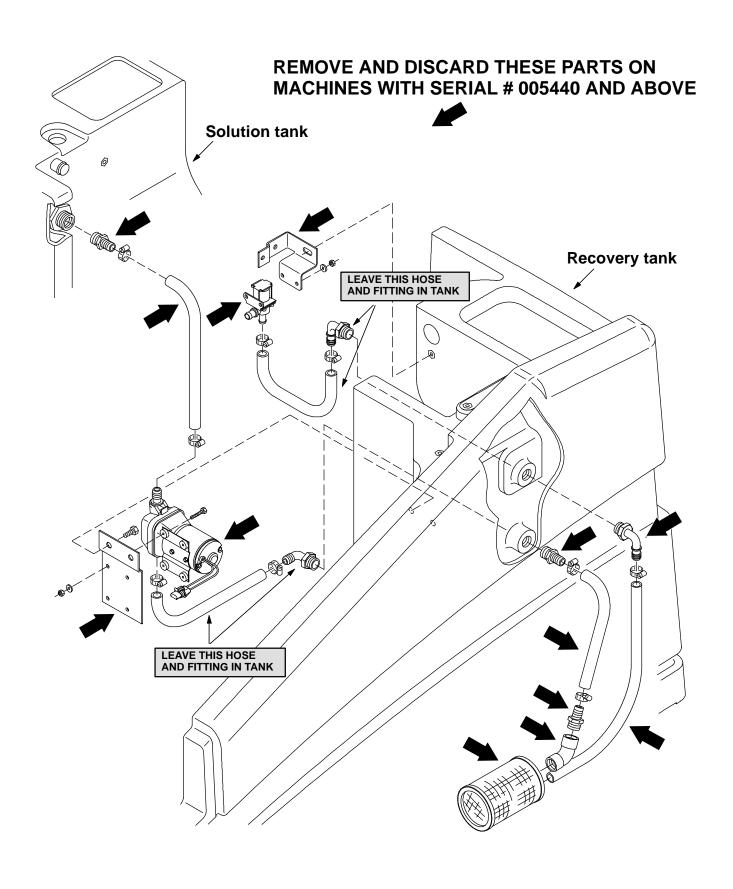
ES[™] Parts To Remove And Discard (machine serial # 005440 and above)
